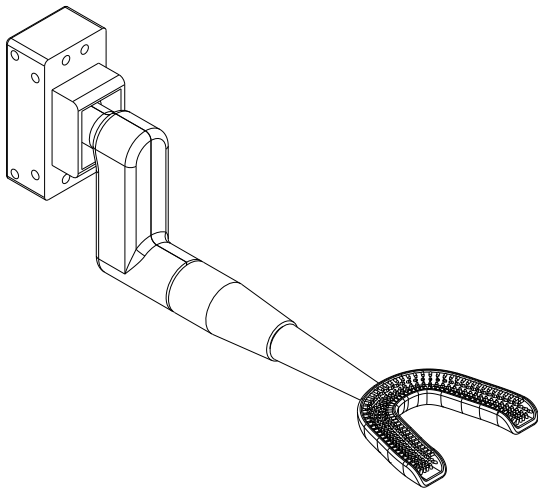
Front-End Assembly: Off-Axis Transmission, U-Shaped Brush Mounted
